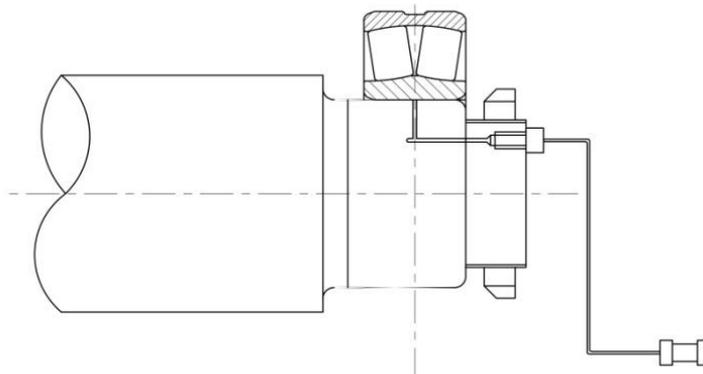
Removal Using Oil Injection Hydraulic Pump
